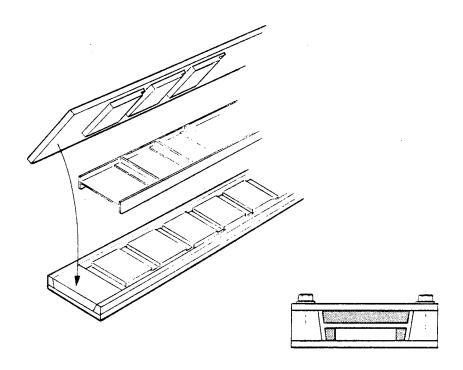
Elastomeric Tool for Molding One-Piece Spars
